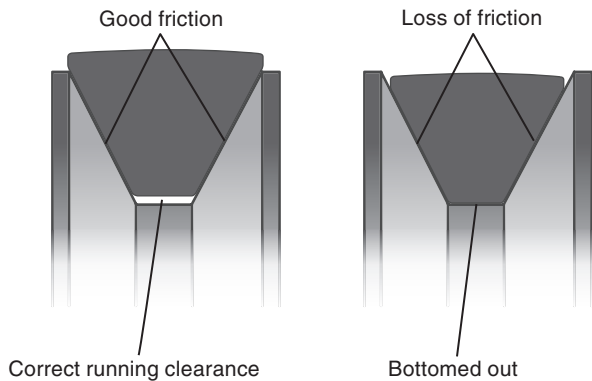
A V-belt worn enough to bottom out should be replaced.
